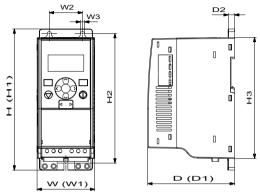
Vacon 20 dimensions, MI1 - MI3
